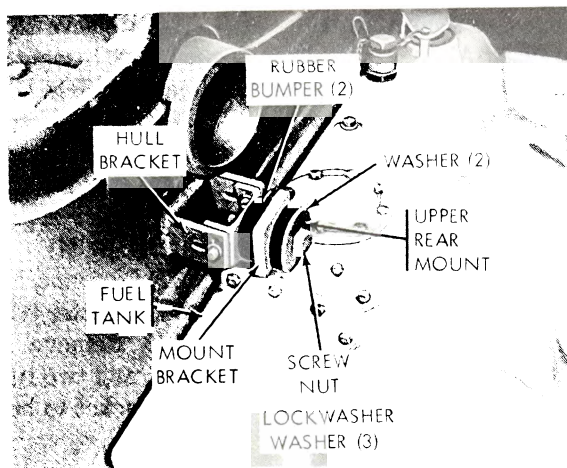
Left fuel tank removal and installation (sheet 2 of 4).
